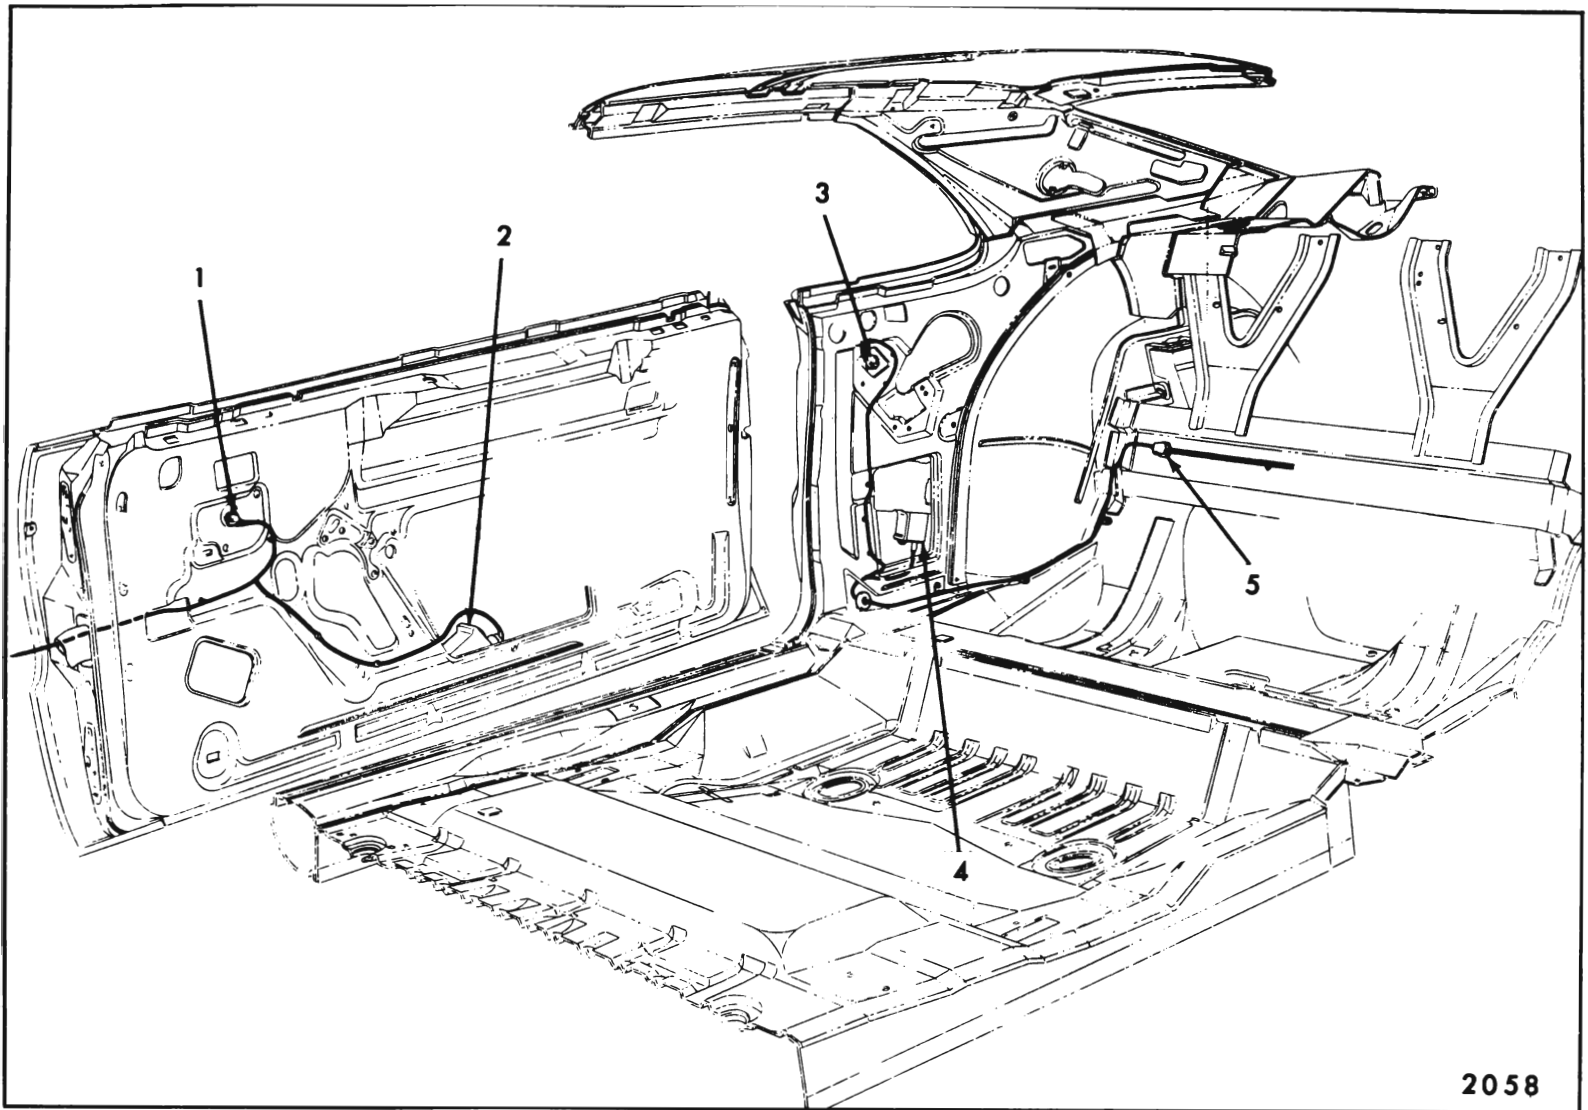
Right Side Power Window Wiring - Oldsmobile "E" - Standard
